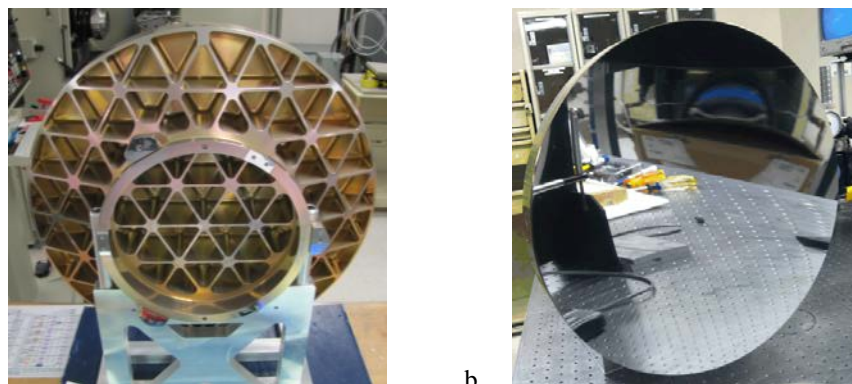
a) Light-weight mirror design. b) Mirror partially finished at the fabricator.
